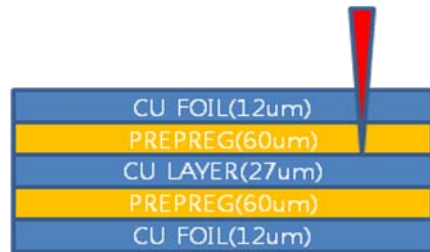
Diagram of process in Copper 3-layer flexible PCB
